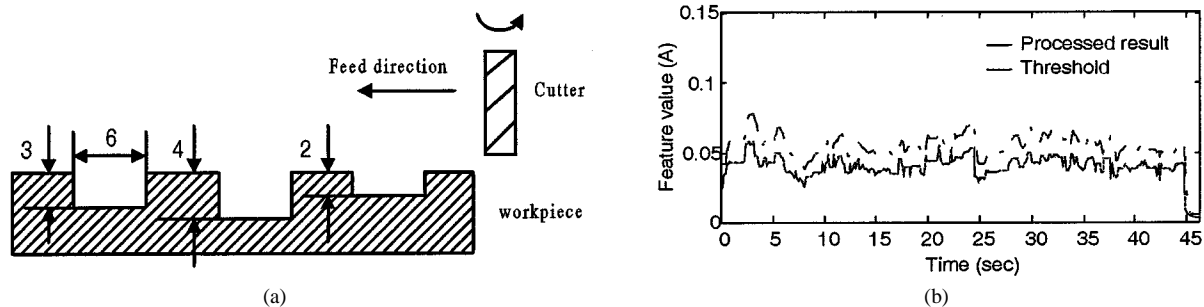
Feed-motor current signals when cutting workpiece with grooves. Tool/workpiece material: HSS/45# steel; spindle speed: 900 rpm; radial depth of cut: 4 mm; axial depth of cut: 4 mm; feed speed: 120 mm/min; cutter diameter: 6 mm; cutter flute: 4. (a) Workpiece. (b) The processed results of the feed-motor current.
